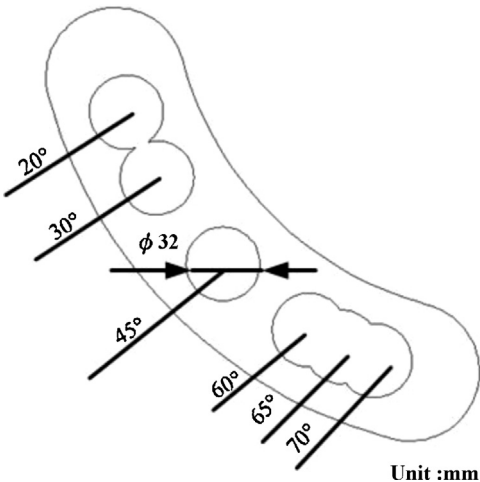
Designed fixture of photodetector with given angles and dimensions.
